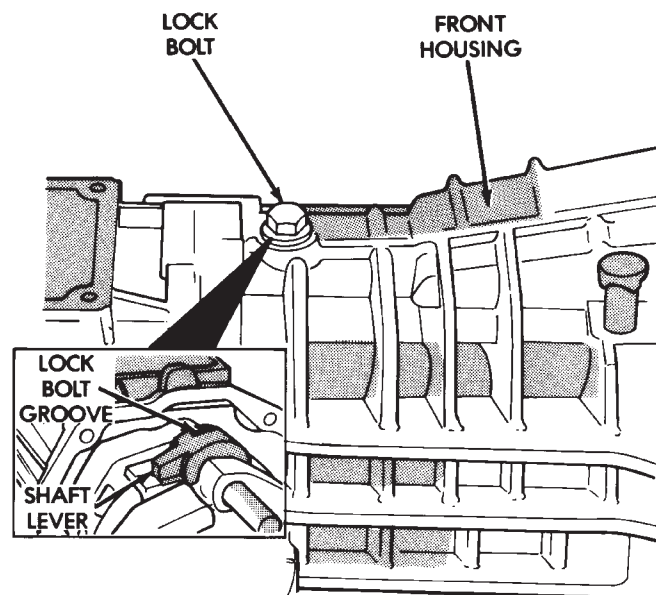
Correct Alignment Of Lock Bolt And Shaft Bushing
